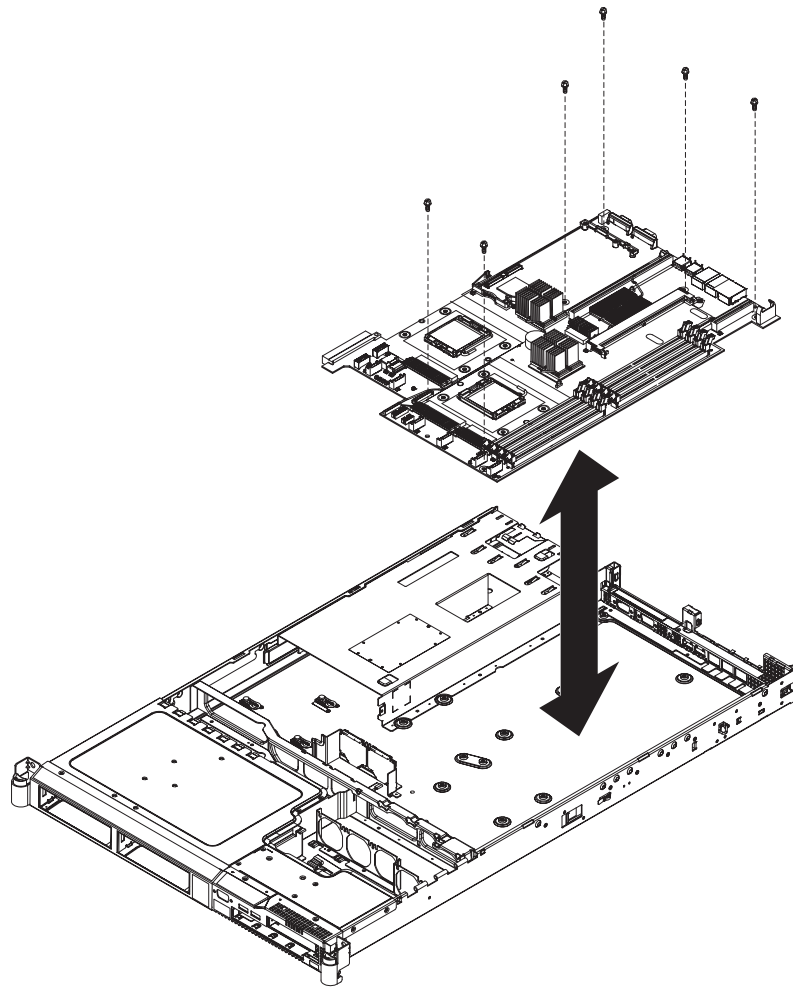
The placement of the screws that secure the SAN Volume Controller 2145-8G4 system board
